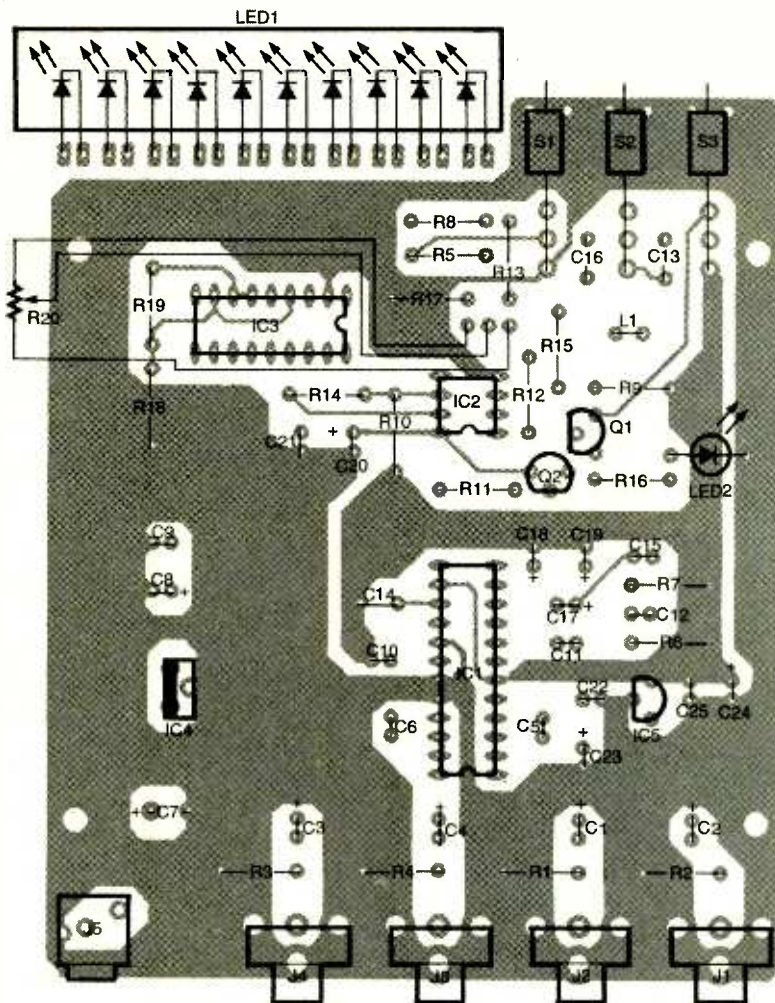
The Universal Noise Reducer uses a double-sided PC board. If your board doesn't have plated-through holes, don't forget to solder the traces where pads are on both sides of the board. No jumpers are needed; all connections between sides are made at component leads.
